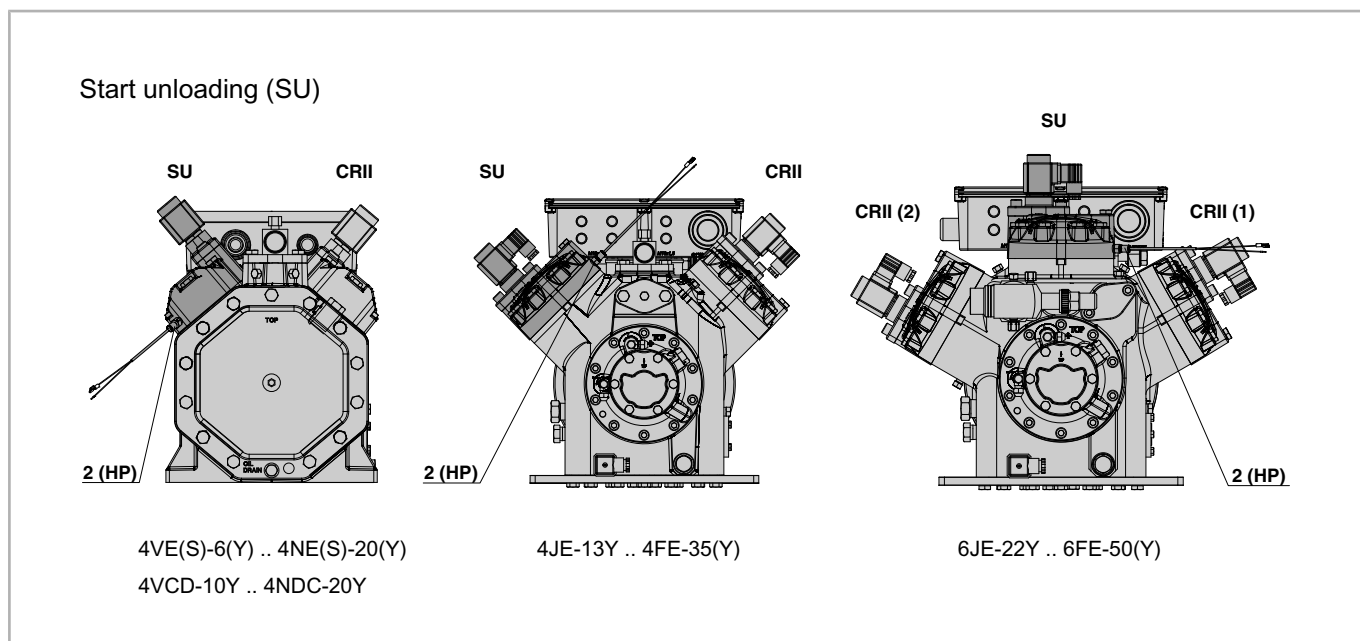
Position of the cylinder heads and valve top parts for start unloading in case of factory mounting
